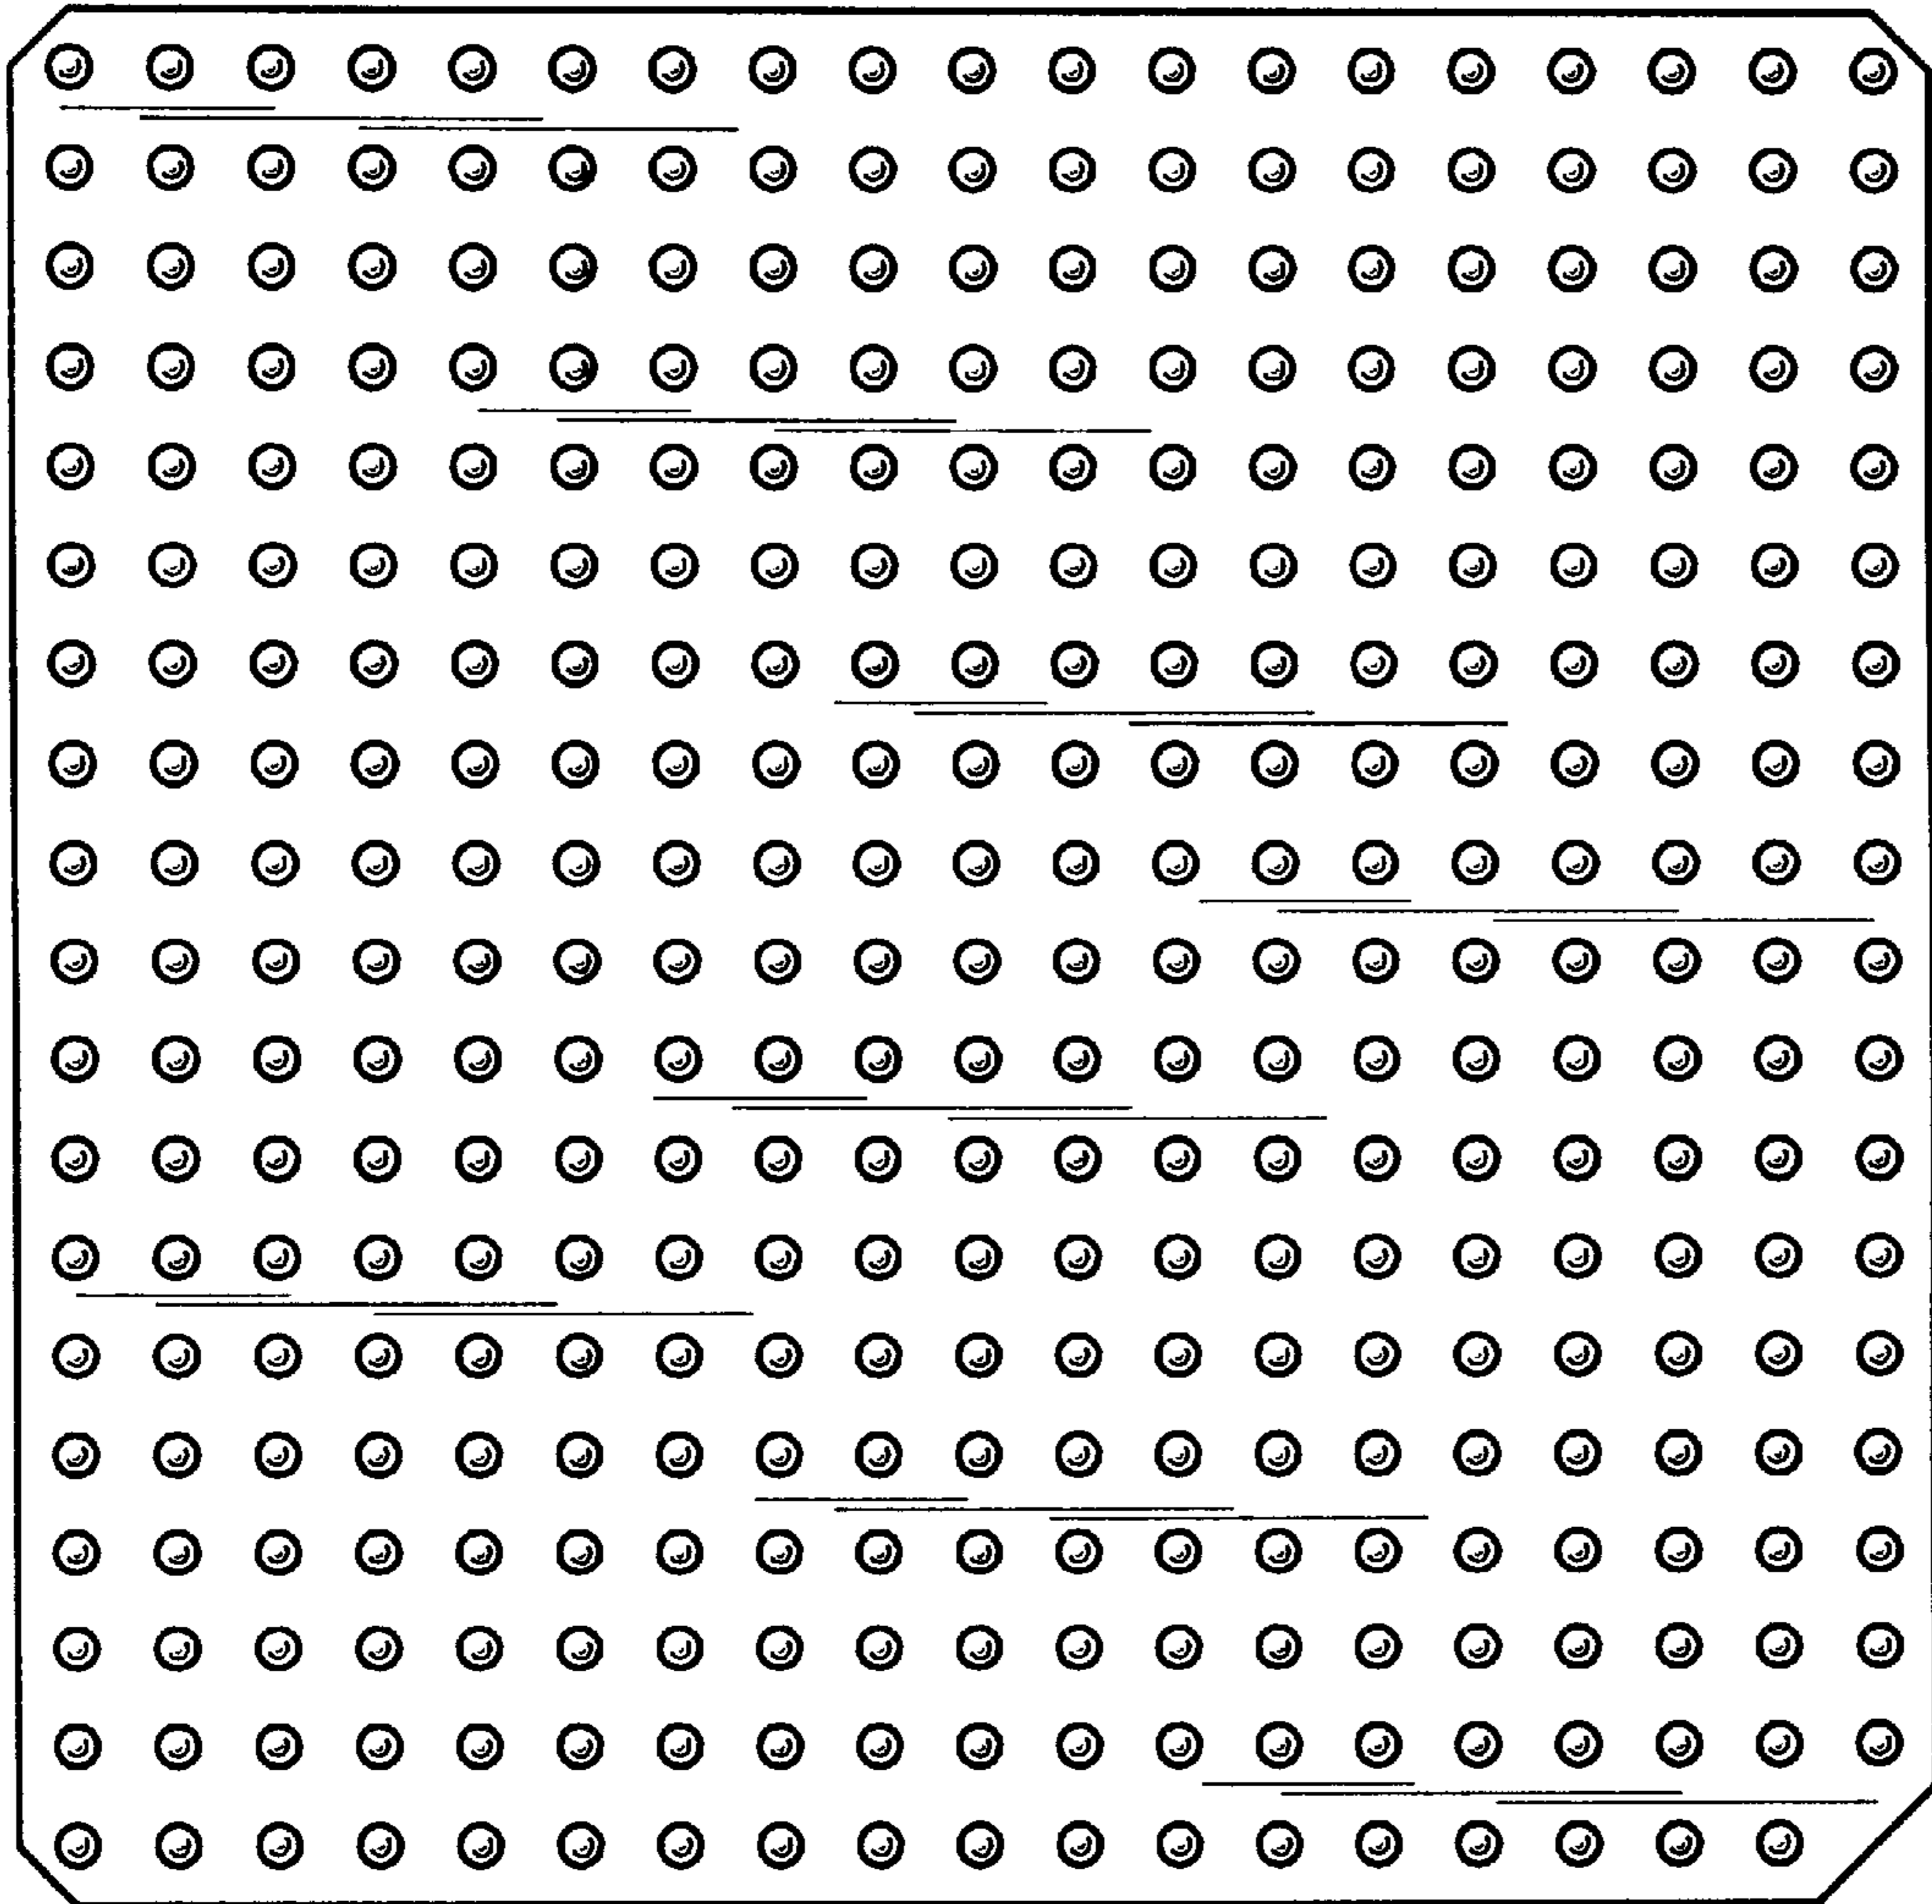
is a bottom, plan view of a solder column interposer according to the present design.
